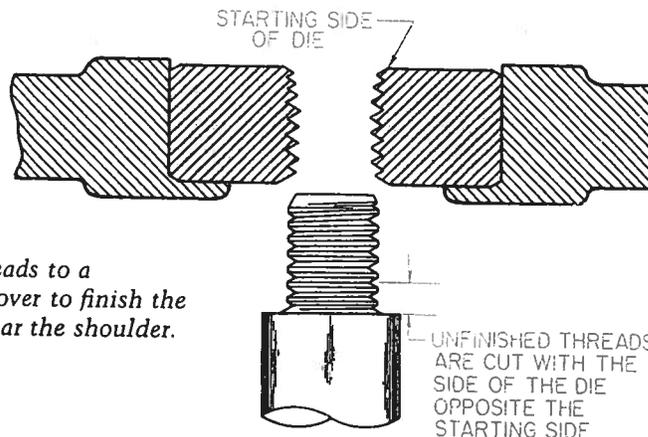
Cutting threads to a shoulder. Turn the die over to finish the partially cut threads near the shoulder.
